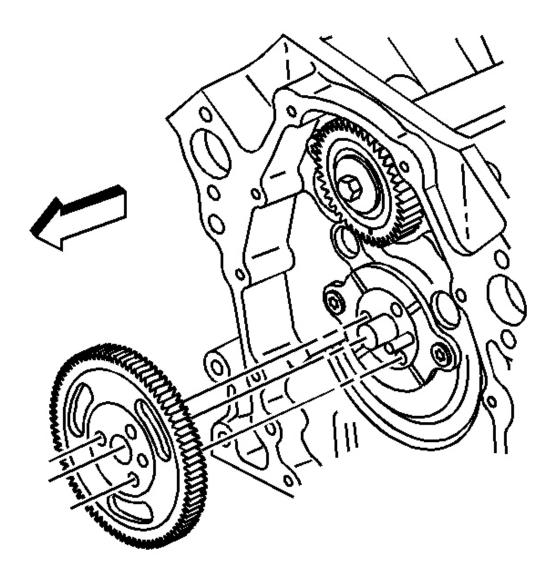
View Of Balance Shaft Drive Gear Courtesy of GENERAL MOTORS CORP.
